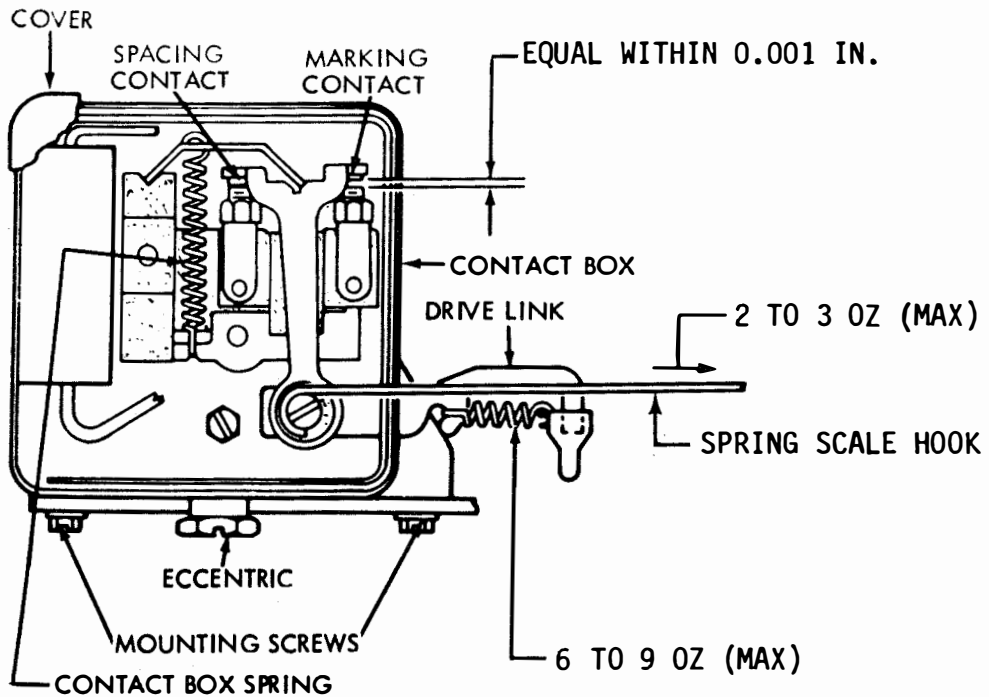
Contact Box Clearance, Contact Box Spring, and Contact Box Drive Link Spring
